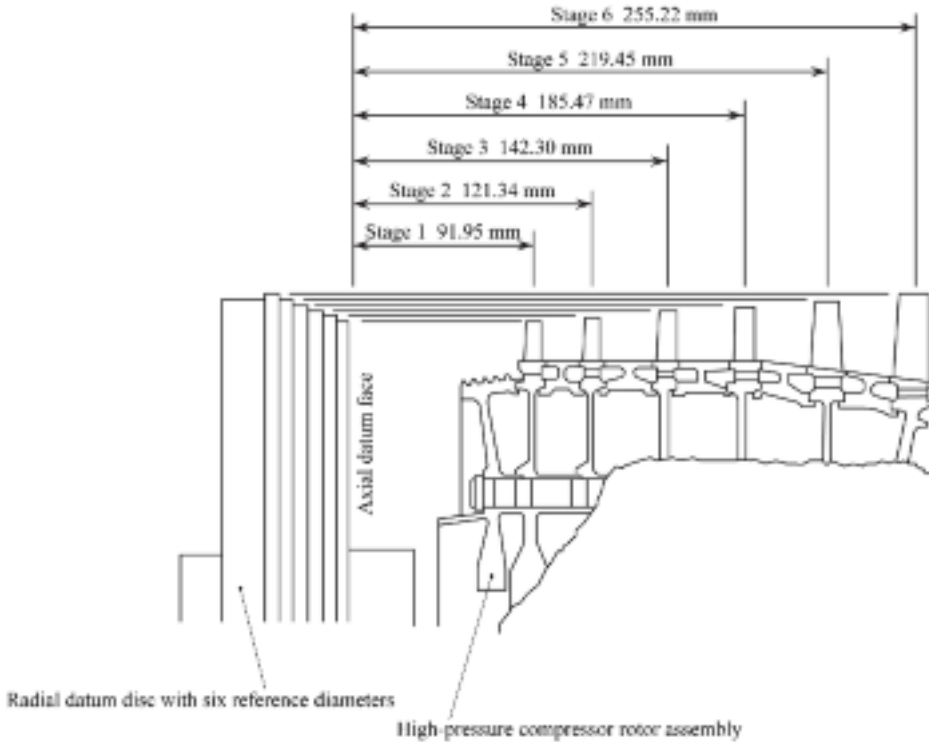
The blading of a typical compressor drum and the datum discs illustrating how the radial and axial datum faces enable machining of blades with a lead angle.
